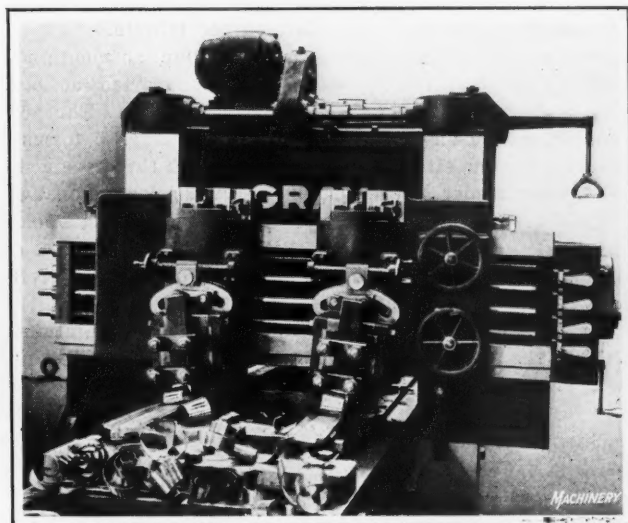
Close-up View showing the Construction of the Heads and Rail
